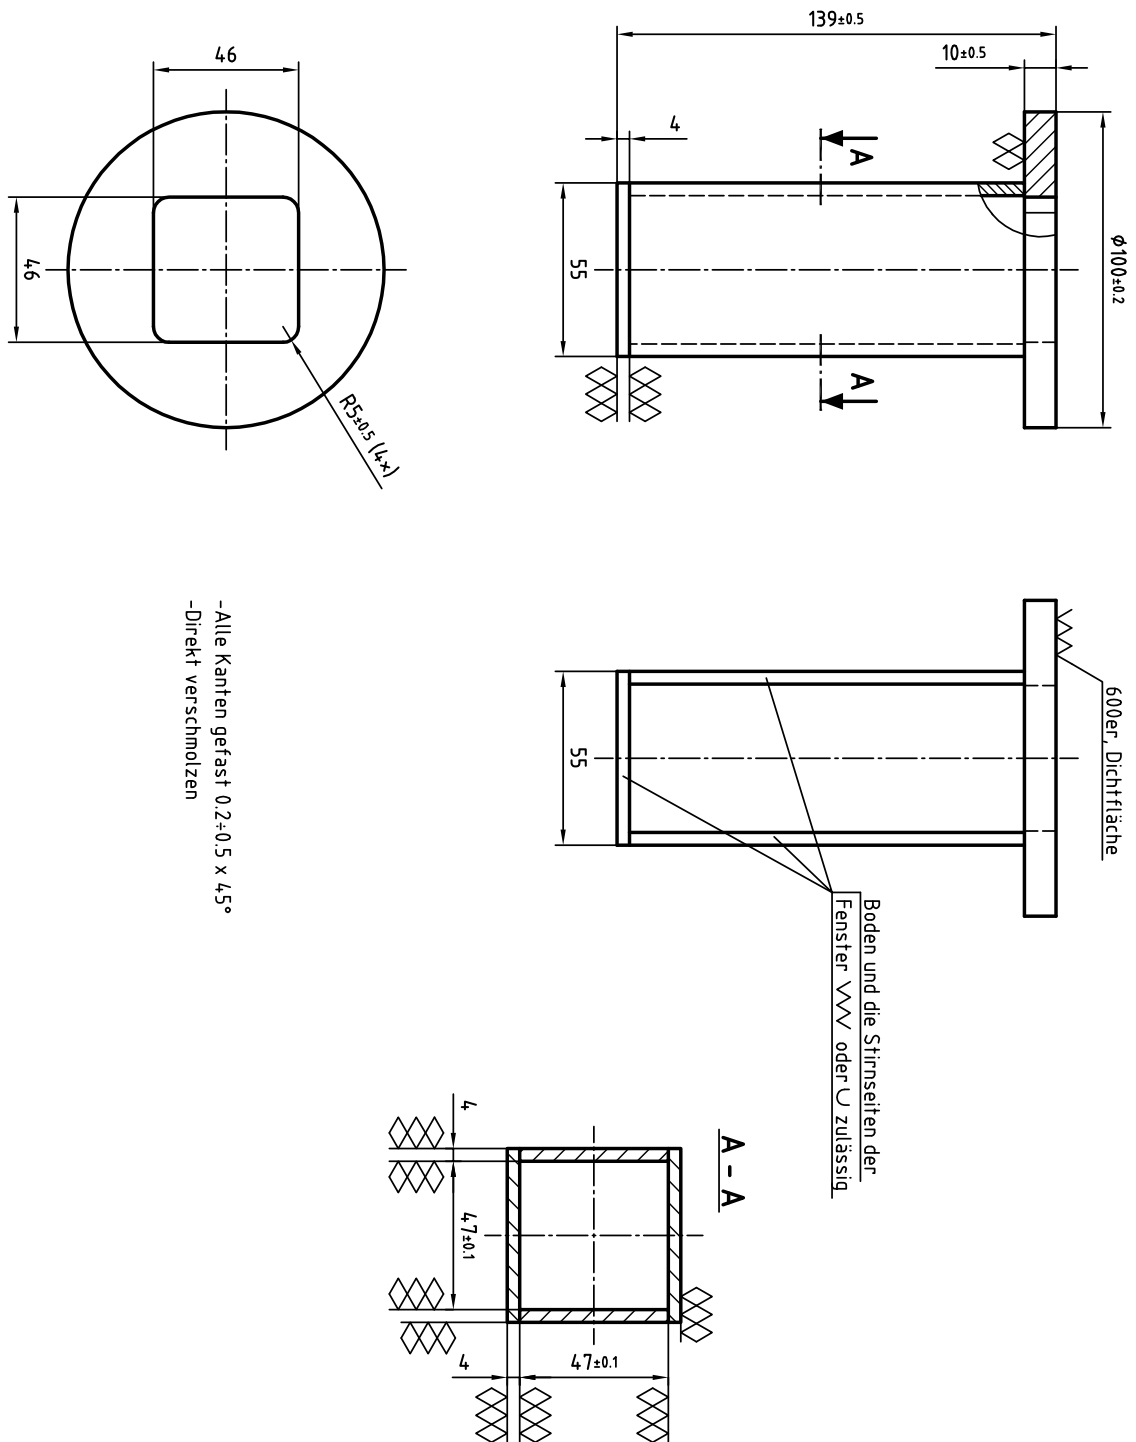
Technical drawing of the 2D-MOT glass cell. Dimensions are given in millimeter. Figure reprinted with permission from Hellma, Germany.
